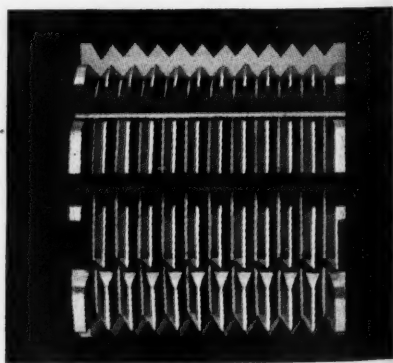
Thread Hob, Without Lead, That was Ground on Standard Thread Grinder Equipped with Standard Hob-Grinding Attachment
